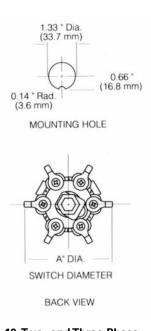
Two- and Three-Phase Mounting Hole and Switch Diameter.
